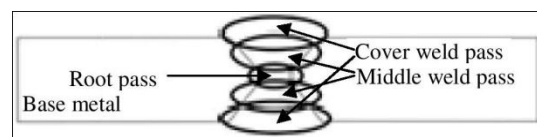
Schematic illustration showing the weld sequence and weld pass details
